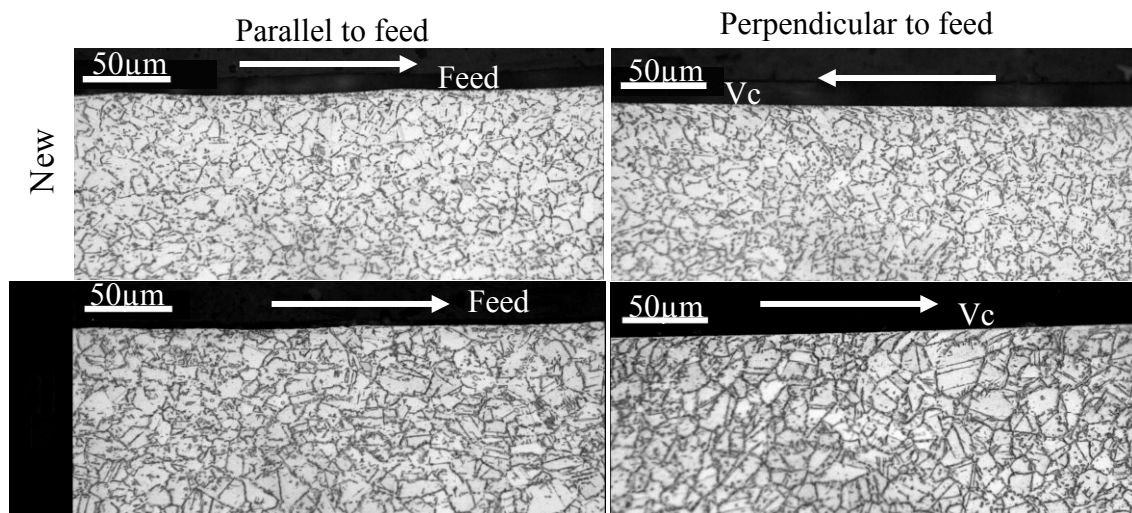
Cross sectional optical micrographs of machined workpiece sub-surface of Test 1 following turning with new and worn inserts
